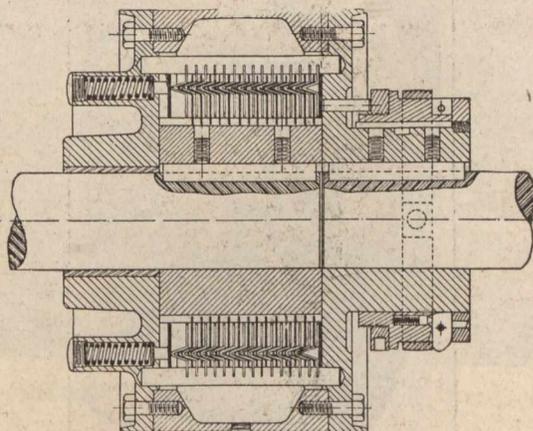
Standard Hele-Shaw Clutch Coupling.
